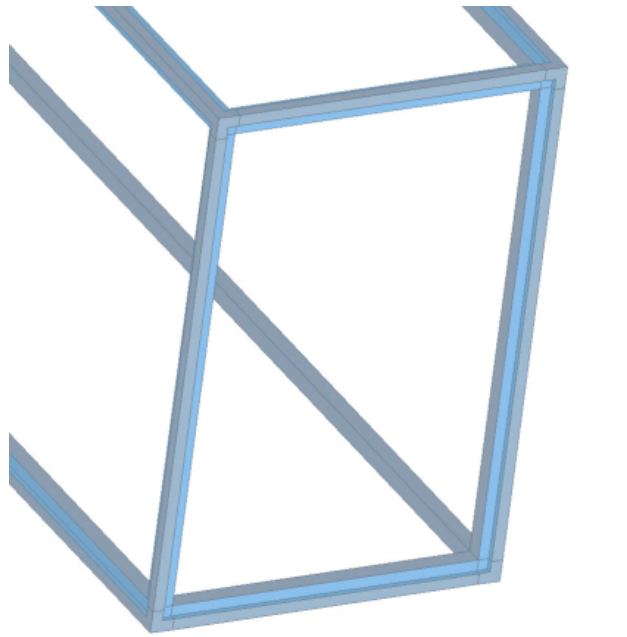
The original frame design for the box. An extra edge would prevent light from slipping through any cracks but it had to be left out due to high machining costs.
